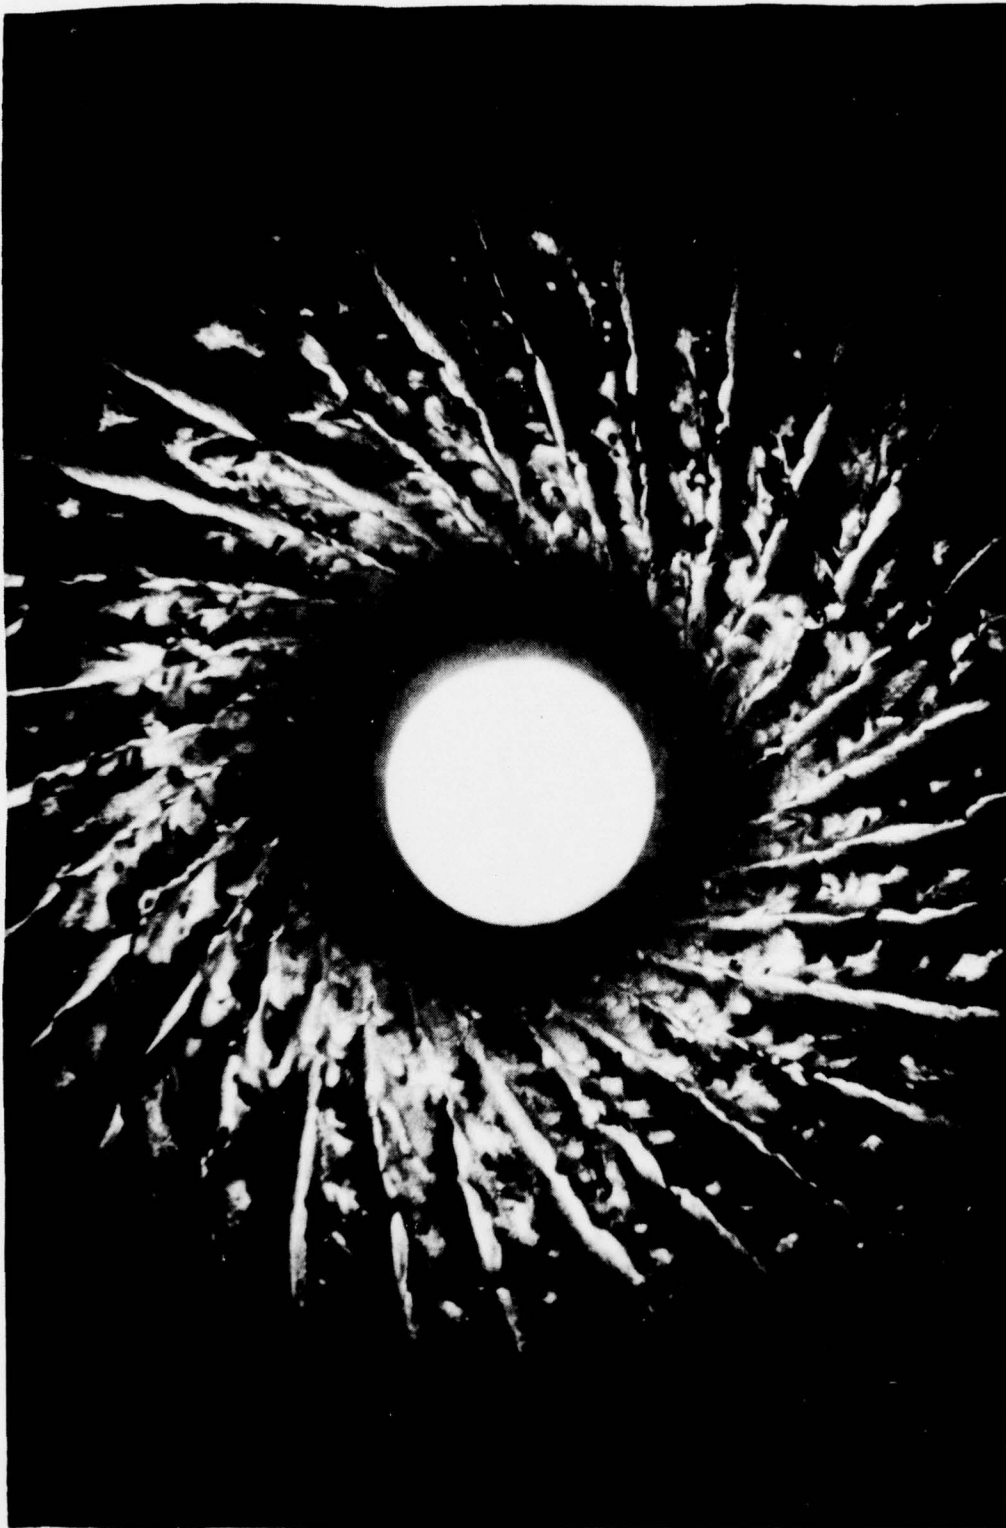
360° VIEW OF ERODED TUBE BORE
